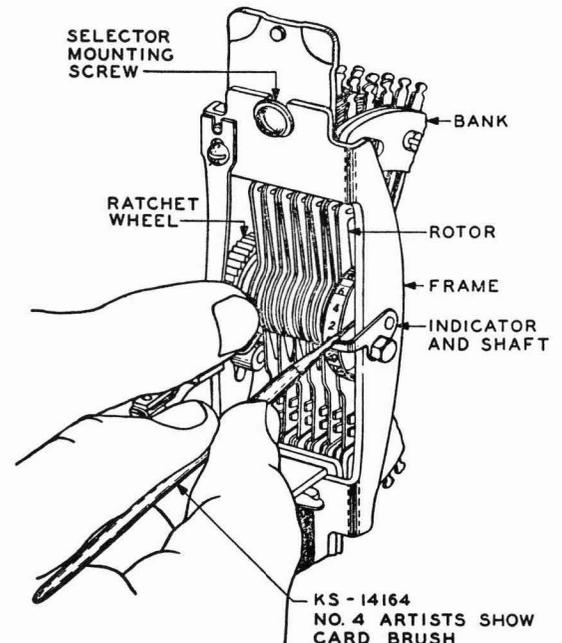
Method of Lubricating Rotor Bearing When Lubricating Hole Is Not Provided
